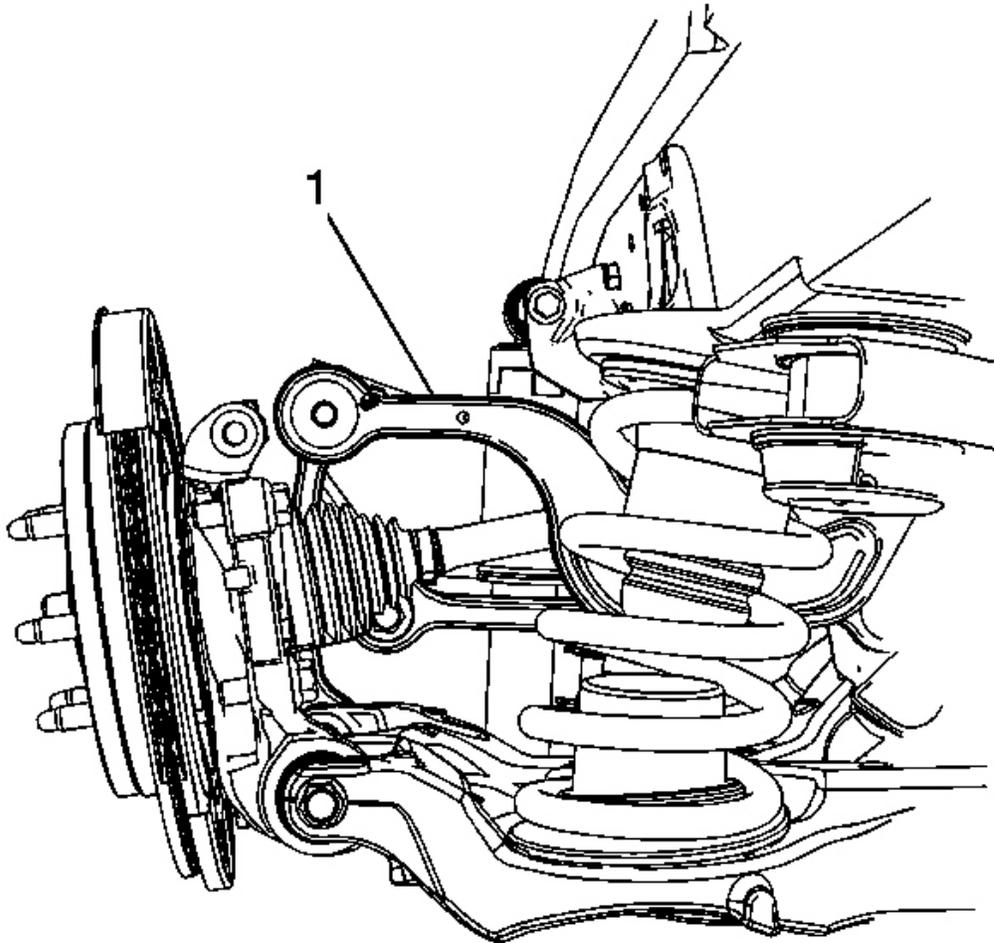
Identifying Adjuster Cam, Cam Nut & Bolt
